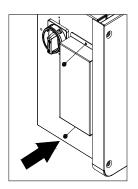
Attach Bulkhead Cover to Wiring Box
